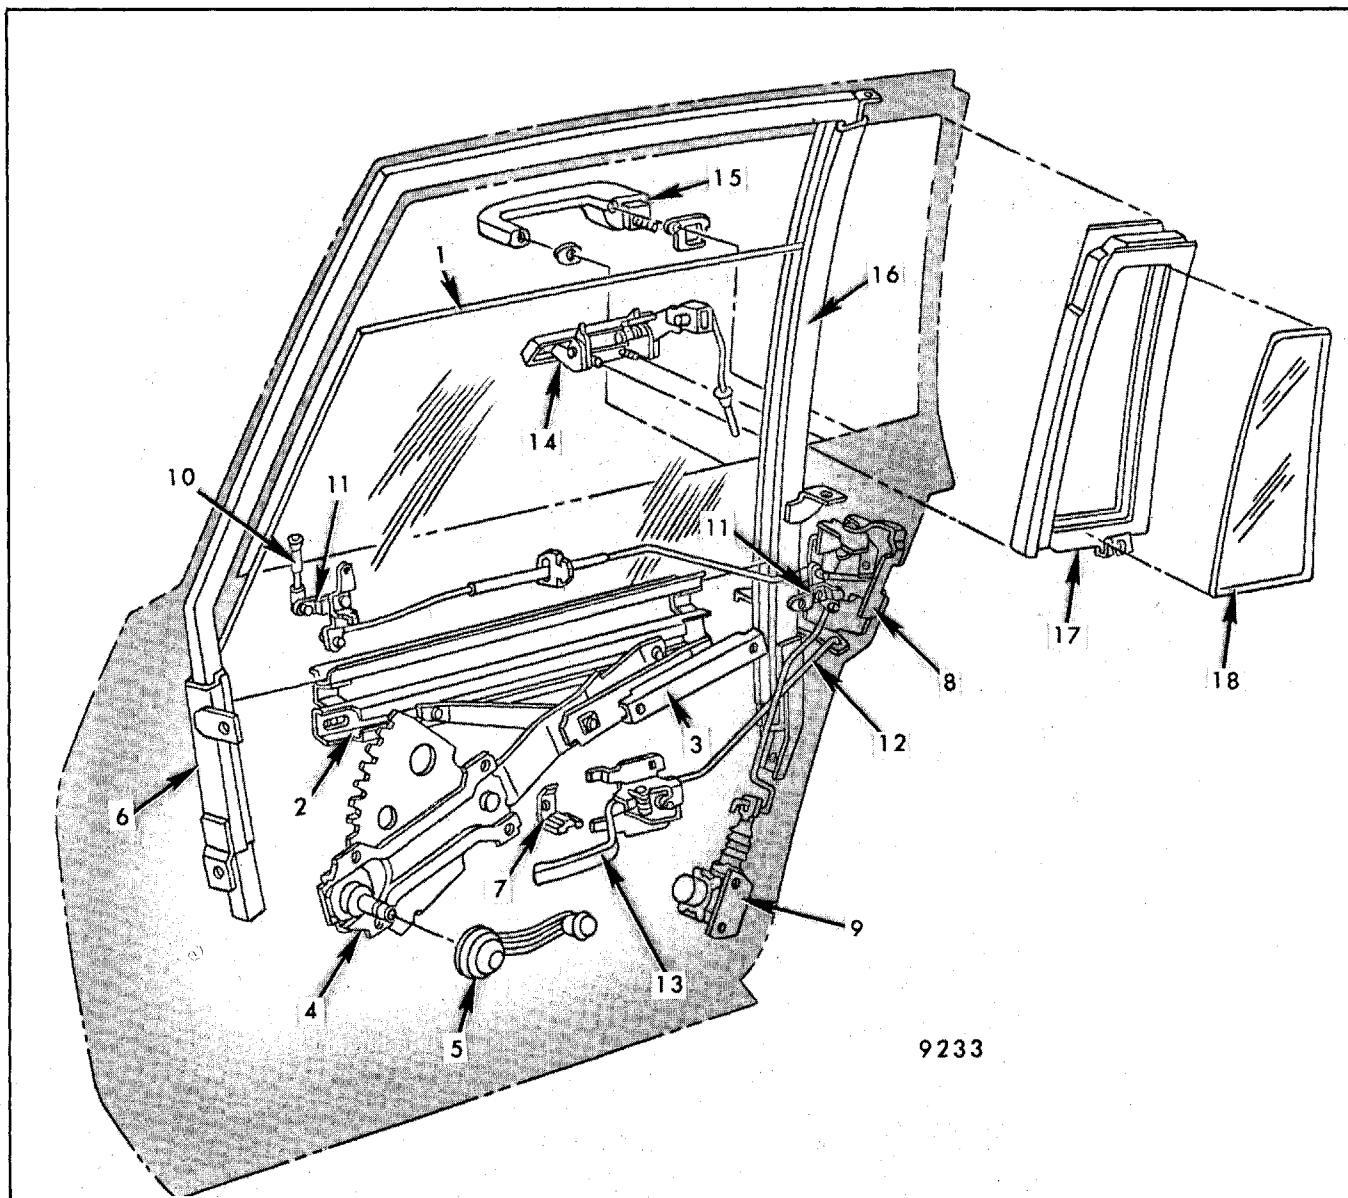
Rear Door Hardware - "B,C" Styles
